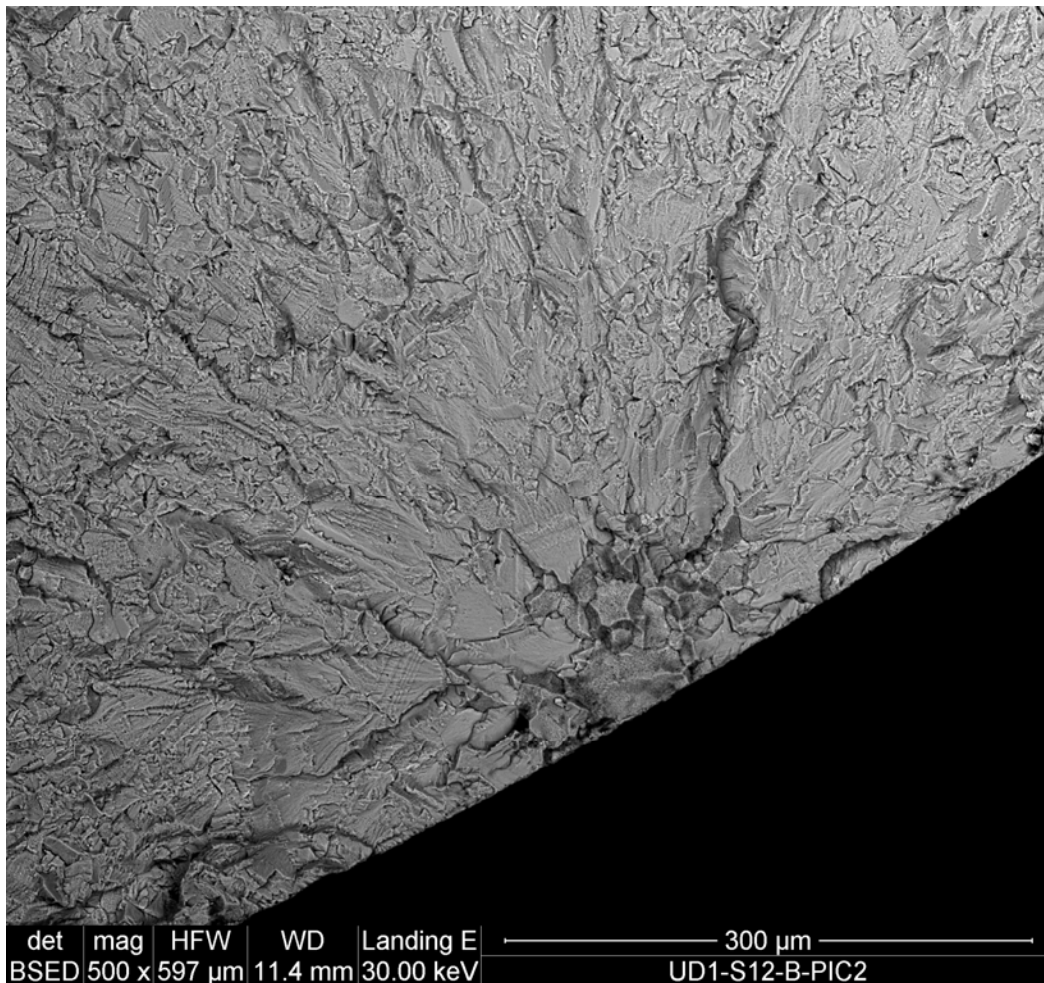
Failure from surface faceted intergranular fracture in specimen UD1-S12 tested at 1050 MPa giving a life of 74762 cycles.
